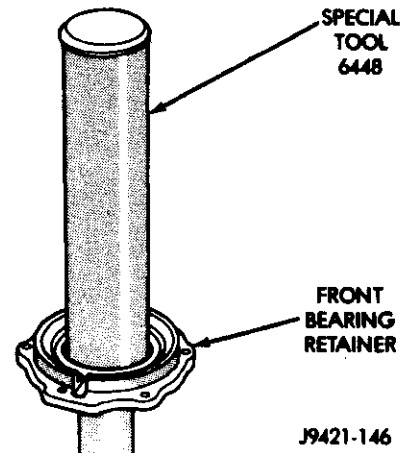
Installing Oil Seal In Front Bearing Retainer
